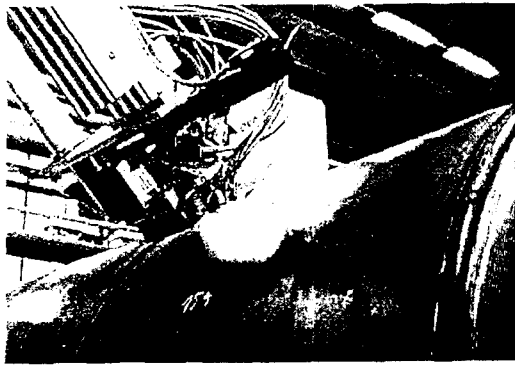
Welding of oil tanks with CO₂ laser-MIG hybrid welding process
